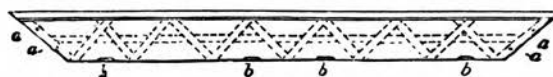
ELEVATION OF AMERICAN SHOOTING PUNT.
